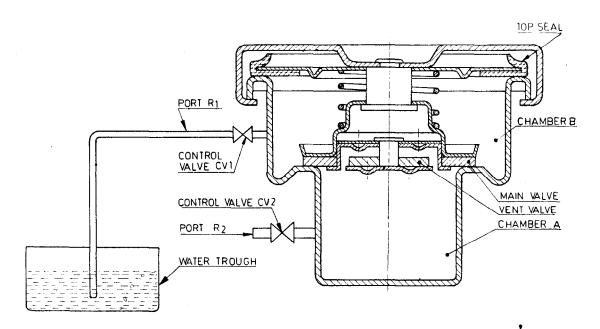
TEST ARRANGEMENT FOR CAP OPENING PRESSURE TEST
